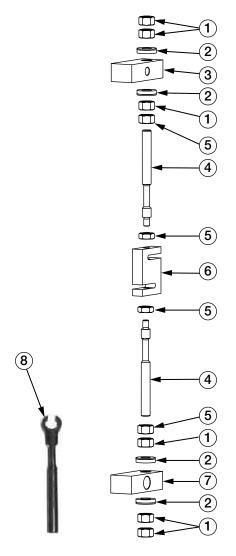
Load Cell Replacement Kit Parts Illustration
